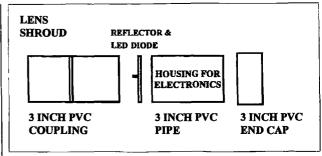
Layout of construction of 3-inch PVC pipe, couplings and end caps for housing reflector and electronics for test circuitry. Reflector is pushed into coupling to touch against center ridge held in place by 6-inch or so length of PVC pipe. From section of coupling forms lens reflector shroud.
